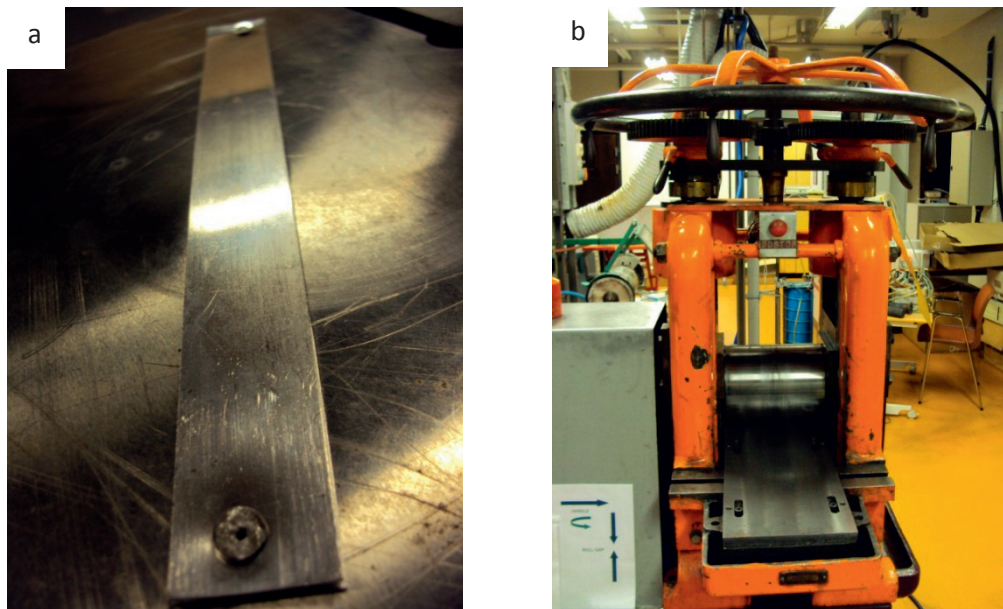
a) Riveted stack ready for roll bonding b) 2 high rolling mill used for roll bonding
